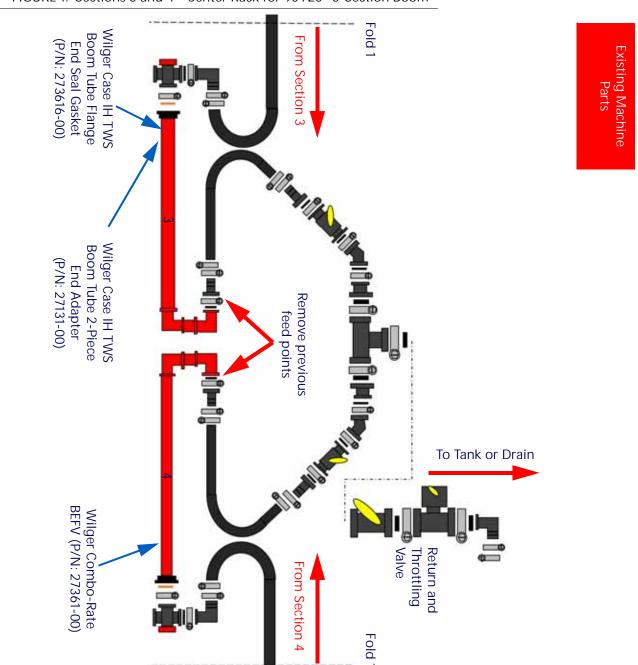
Example Plumbing of Center Rack Sections 3 and 4
